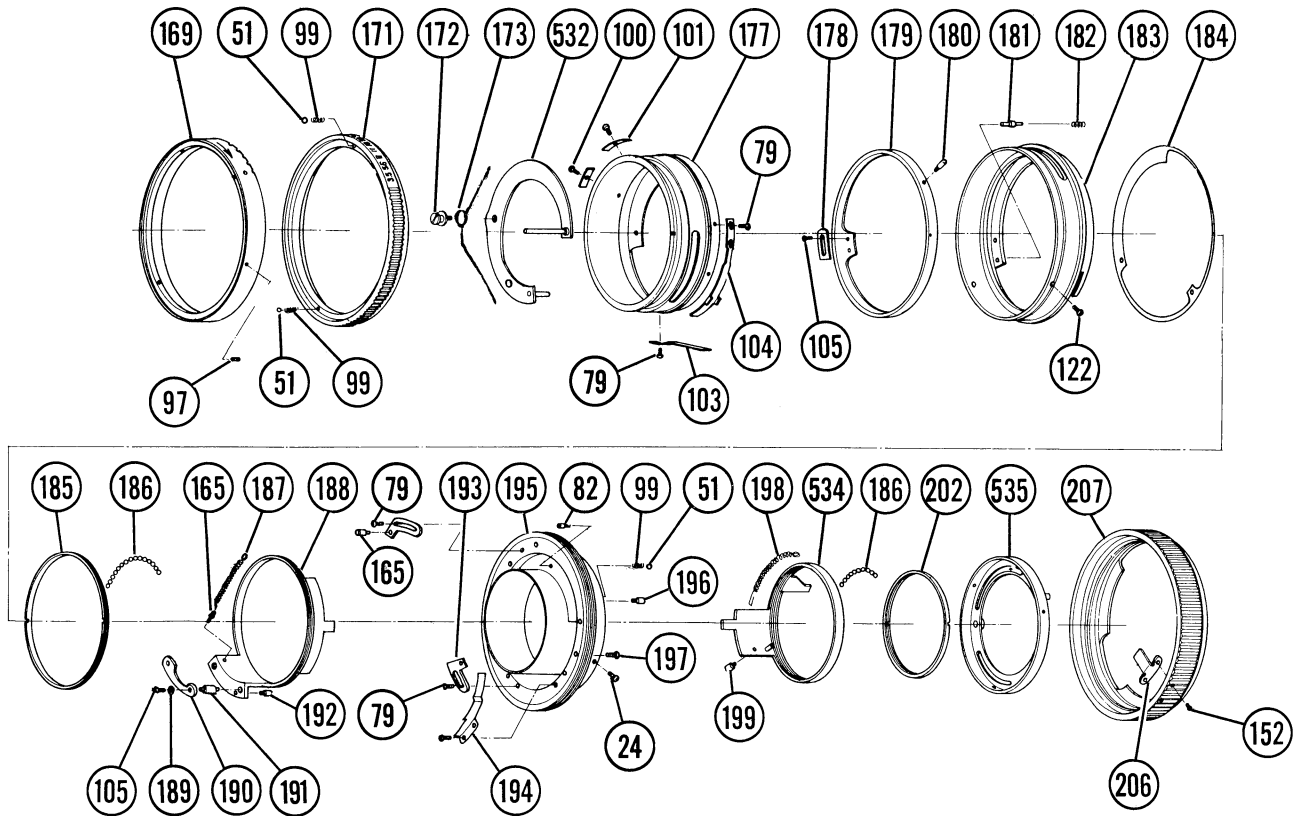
Mount Assembly, Canon (Ref. 550, Pg 58)
